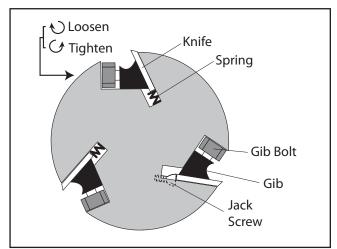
ST1007 cutterhead components (springs and jack screws both shown).
